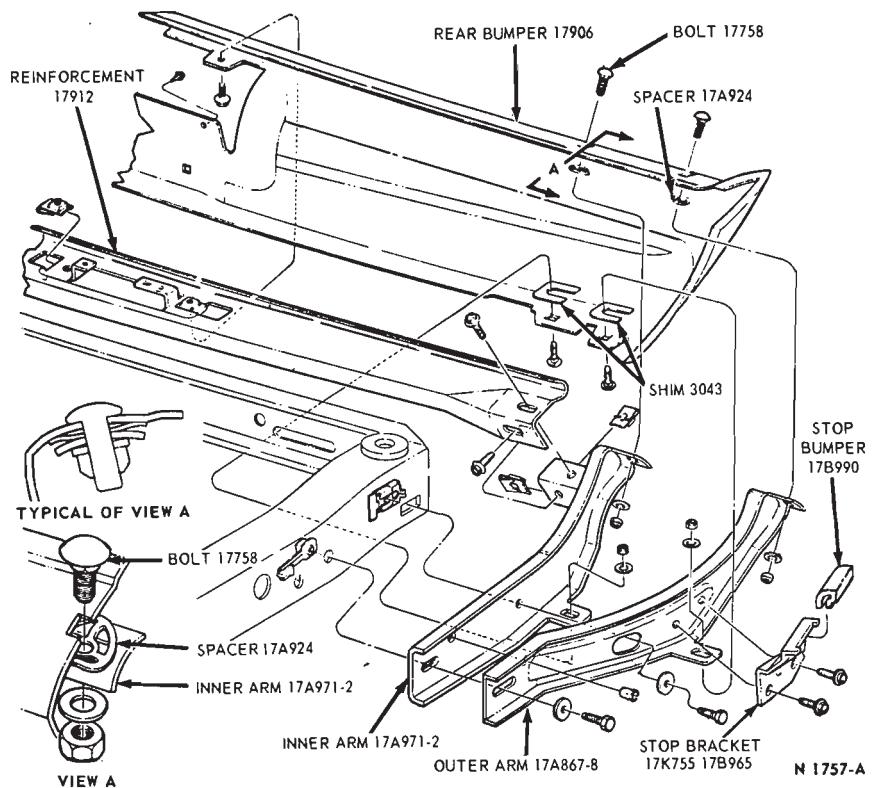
Rear Bumper Installation—Ford Except Model 71
